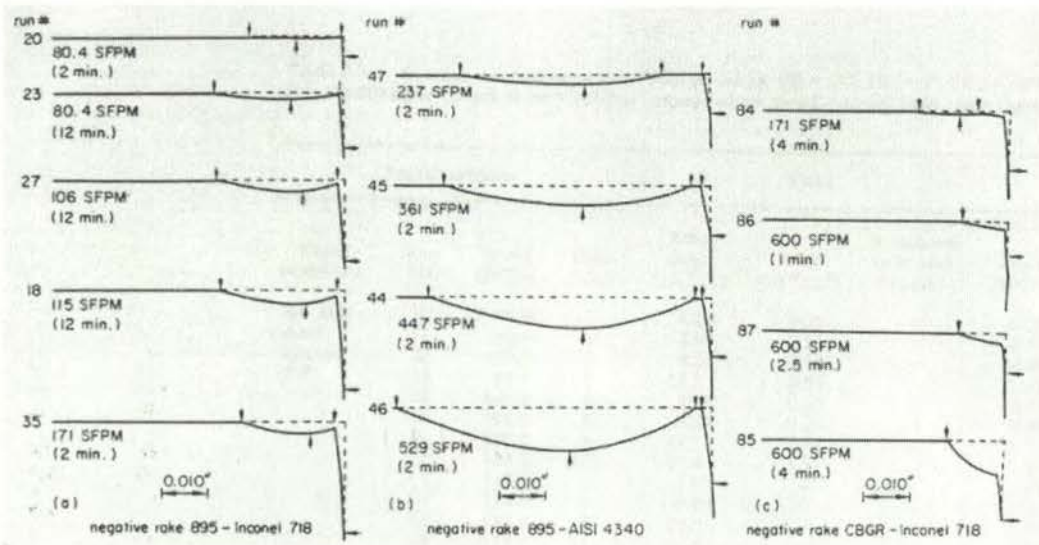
The profile of the worn rake face of a carbide tool used to machine Inconel 718 and AISI 4340, showing the absence of the 'cool region' in the case of Inconel 718 [170].
